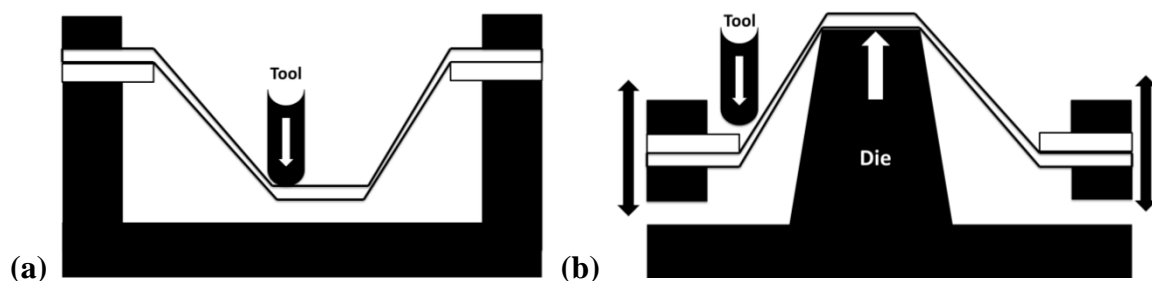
Types of Incremental Sheet Forming Fixtures; (a) Positive, (b) Negative.
